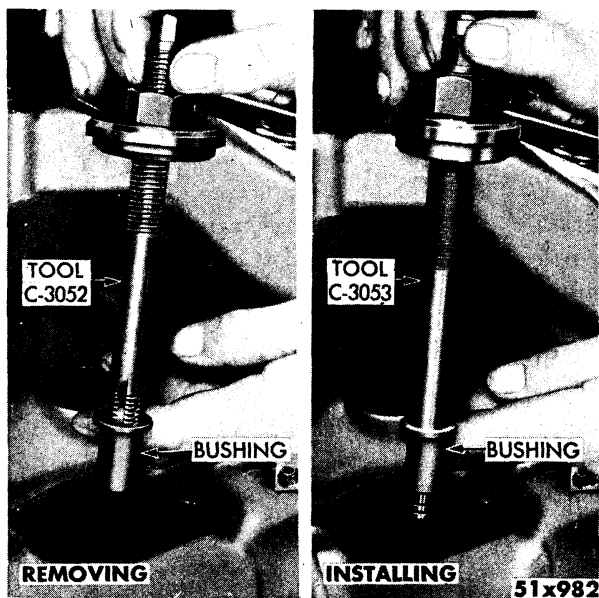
Removing and Installing the Distributor Drive Shaft Bushing
